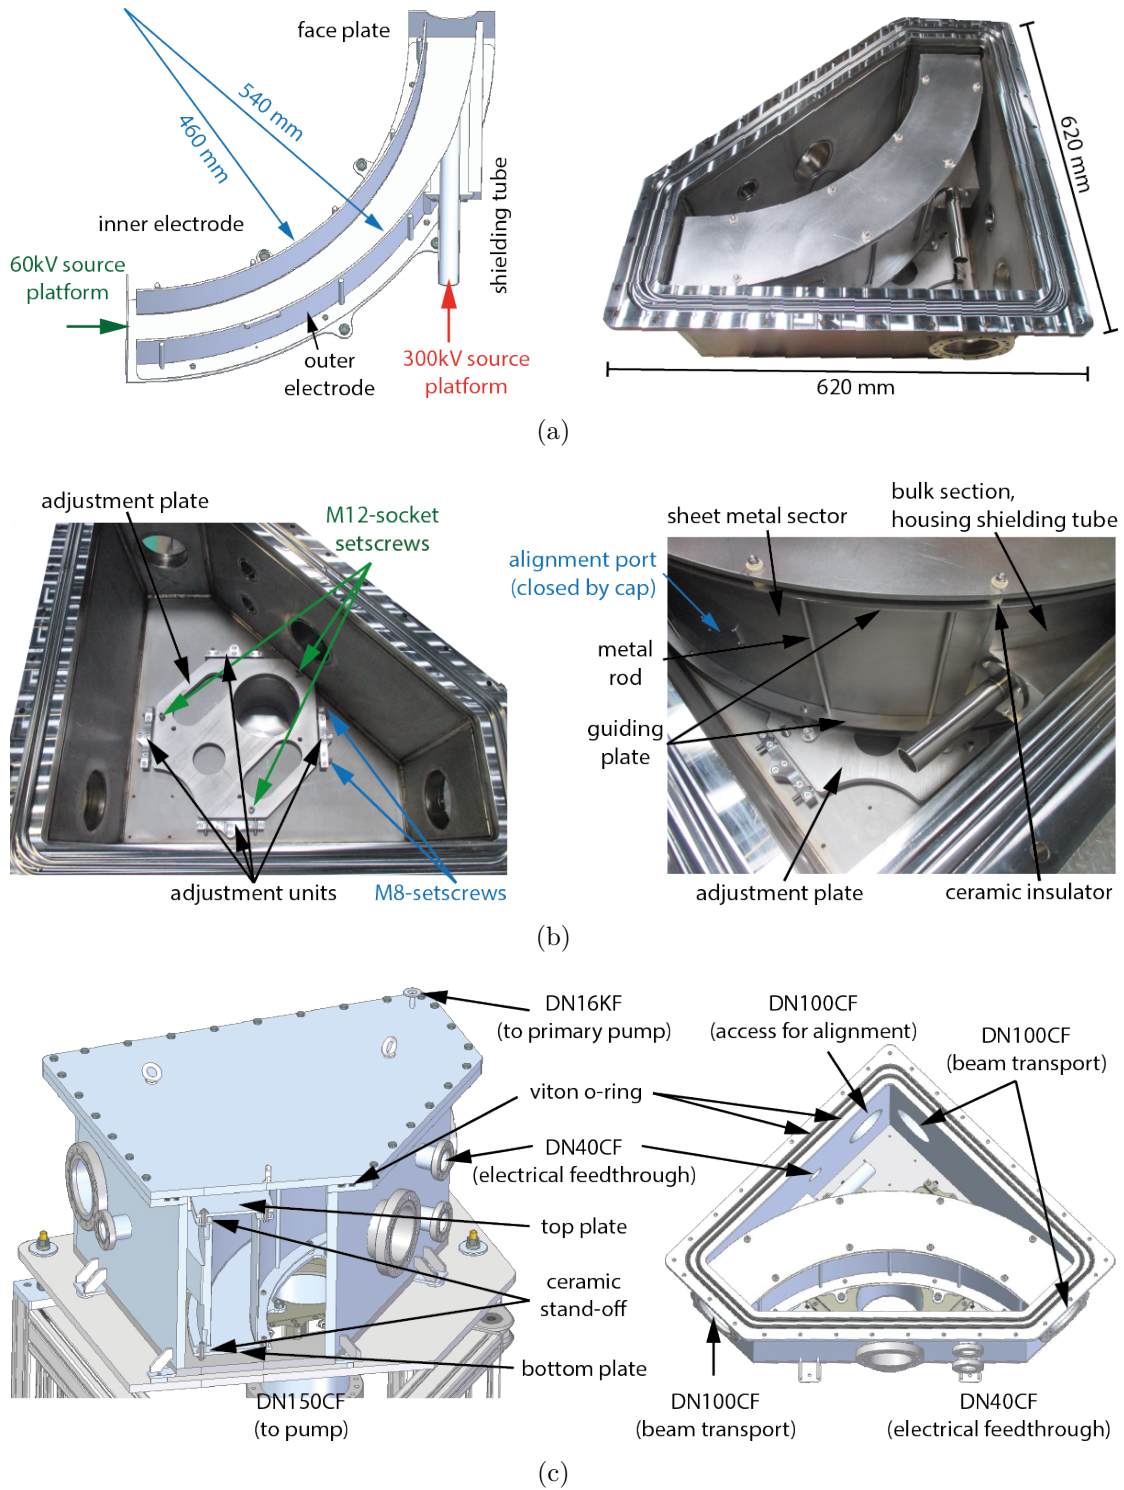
Construction drawings and photographs of the 90° deflector.
